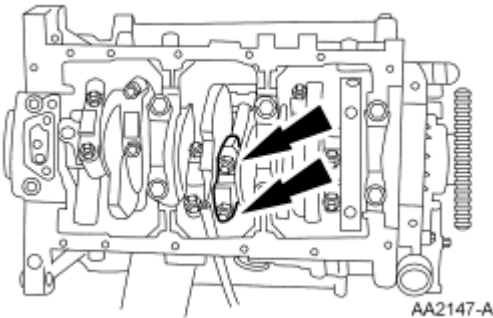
Locating Nuts & Connecting Rod Bearing Cap
